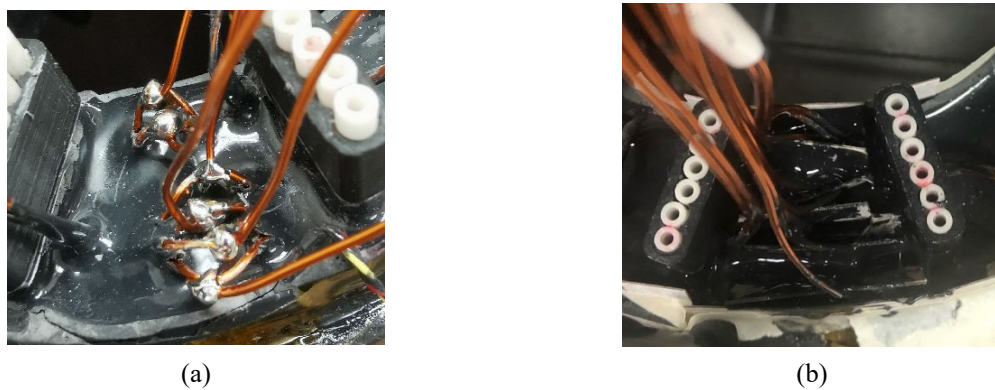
Faulted turns 27, 36, and 47 (6 strands total) in phase A3: (a) exposed turns after solder step and (b) re-insulation of solder joints and strands.
